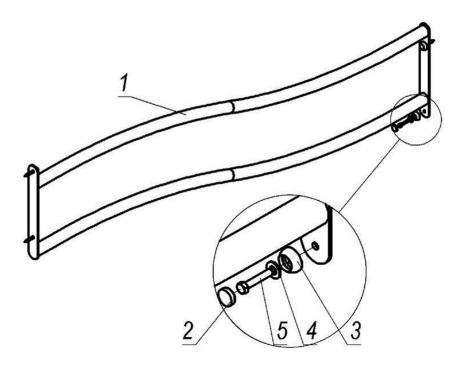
Completeness and layout of the 1.5 m slide complete with a beam
